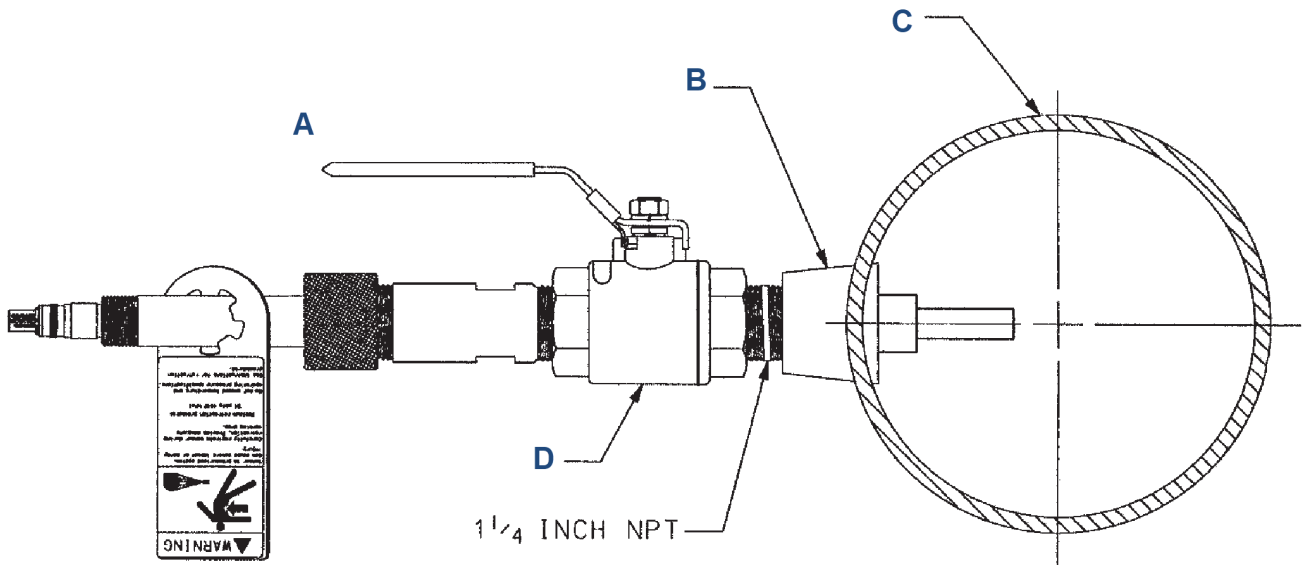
Rosemount 402 Retractable Sensor Installed in a Standard Tee
